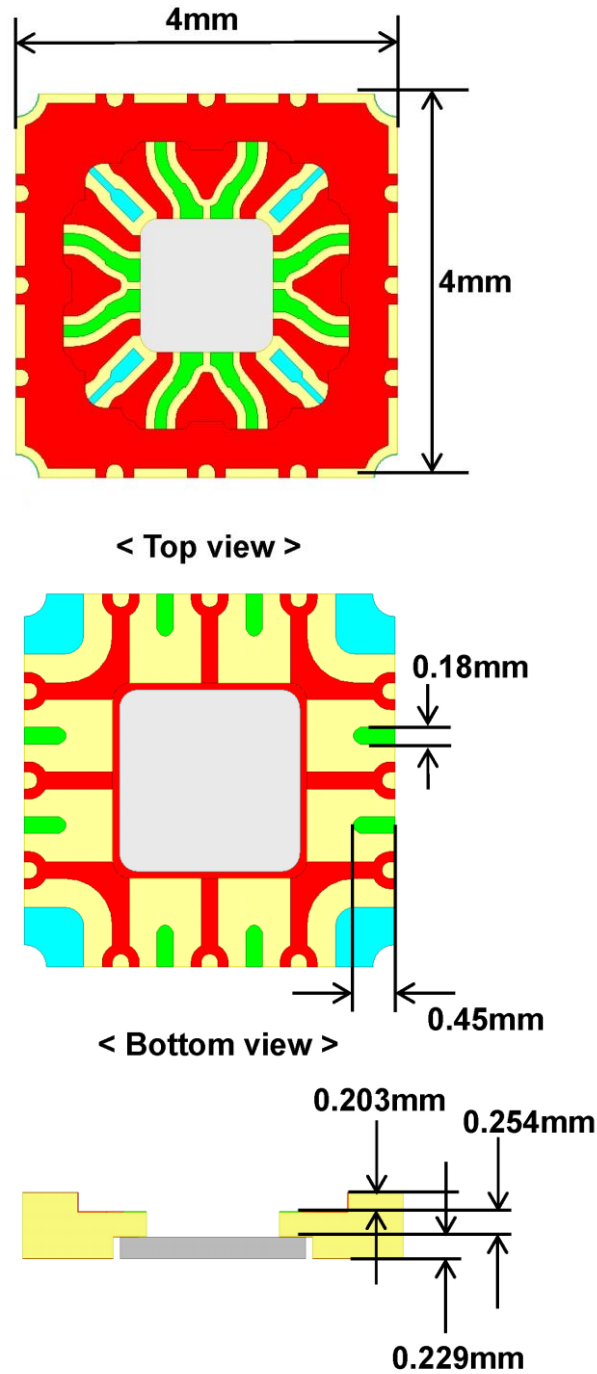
CQFN 24-Pin Package Drawing (All Dimensions in mm)
